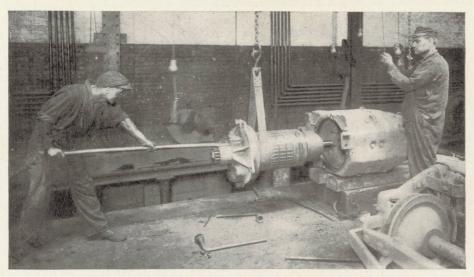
REMOVING ARMATURE FROM A BOX FRAME MOTOR. METHOD NUMBER ONE
